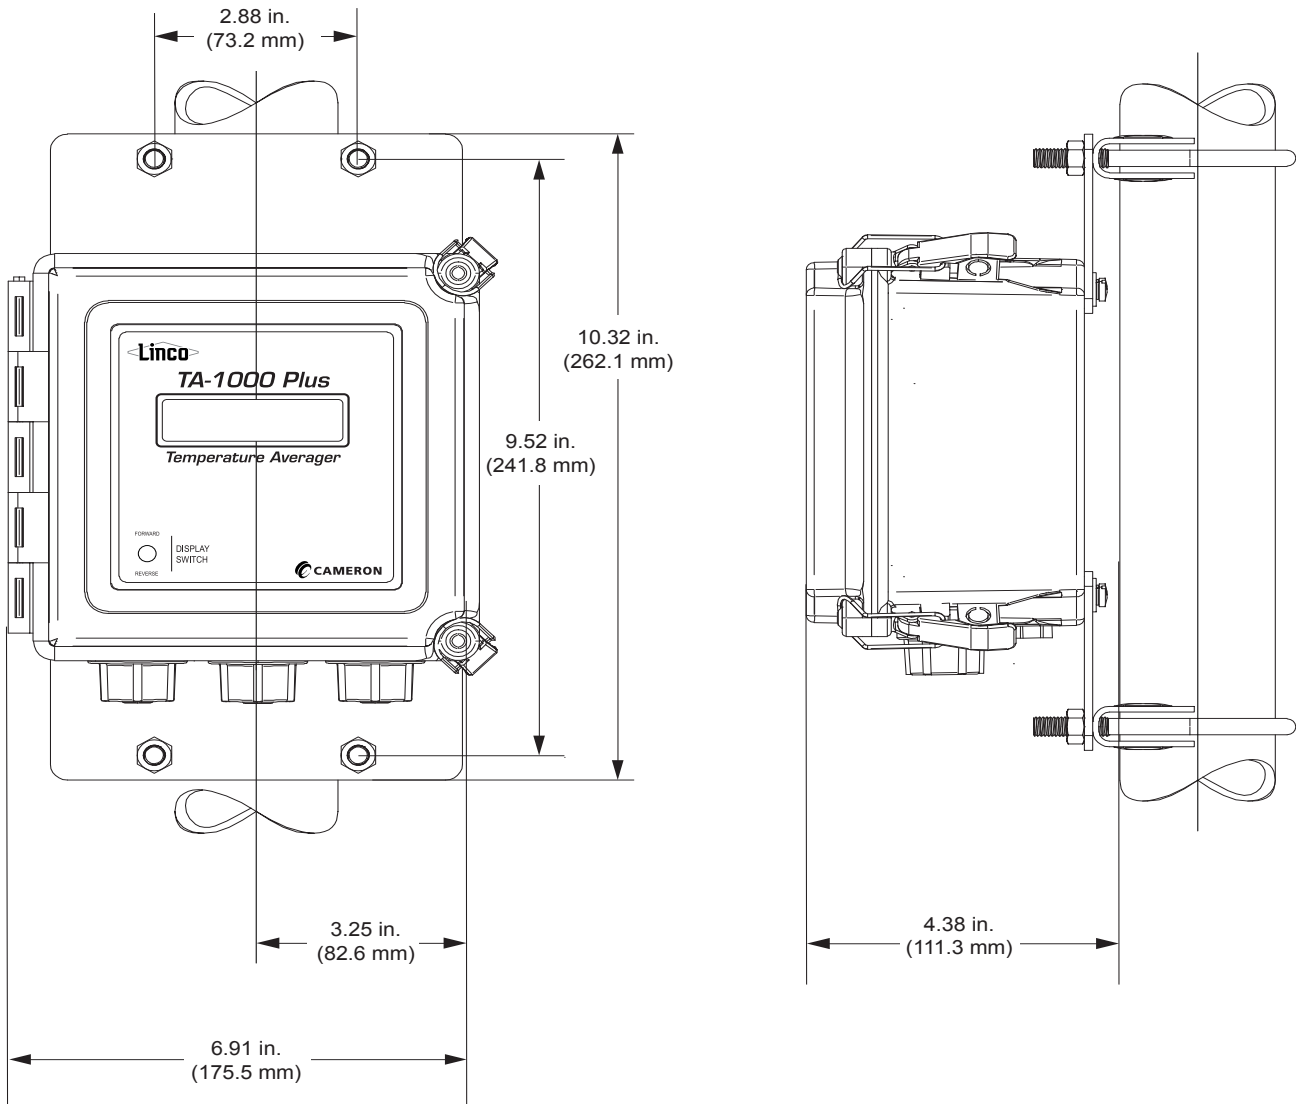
Typical dimensions for pole-mount installation, weatherproof package
